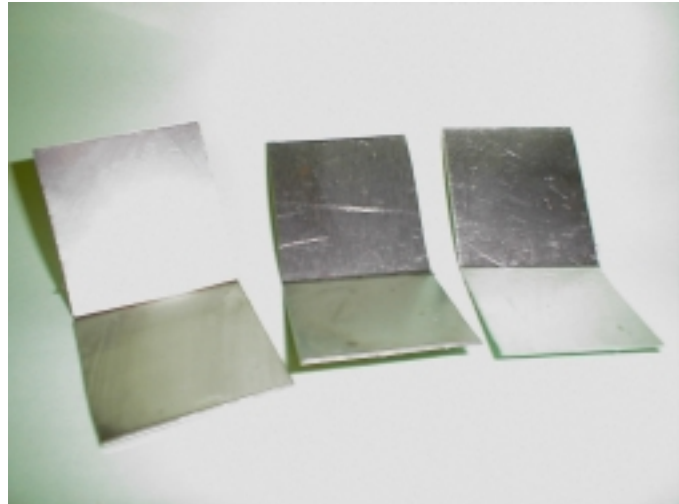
Laser bent thin metal sheets : 304 stainless steel (left), 1010 carbon steel (center), 1100 aluminium (right).
